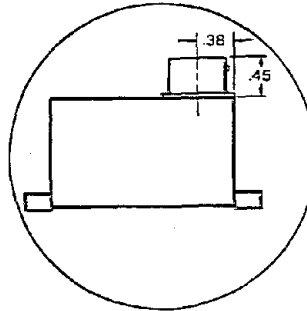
A typical accelerometer used for pavement instrumentation. [44]
